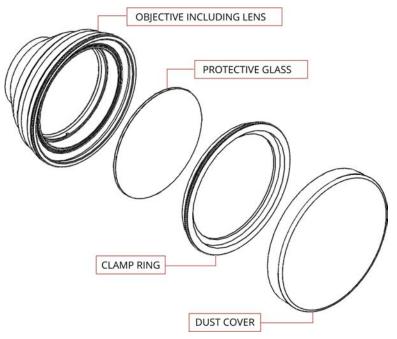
Example of F-Theta Lens (Complete Assembly)
